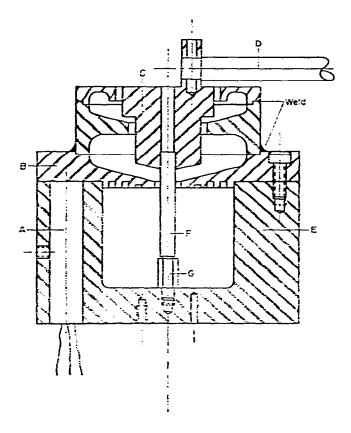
Experimental assembly for time-to-explosion test. Parts are the following: A = cartridge heaters (3 each); B = top assembly, bolted to base; C = sample-cell holder assembly, the sample cell being insulated from the holder with a band of glass tape around its top; D = sample-cell-holder pivot arm, allows cell and holder to be inserted into the lower assembly remotely; E = metal-bath container, made from mild steel for stability with molten metal; F = sample cell; and G = sample-cell support pedestal, length adjusted according to length of sample cell. Also shown in the base are a grounding lug and a thermocouple well.
